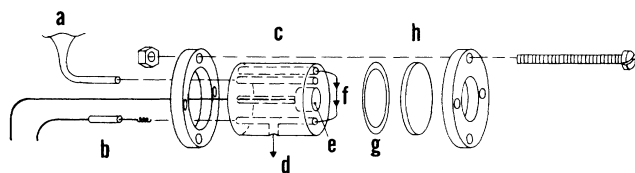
Exploded view of the thin-layer electrochemical sample chamber. The assembly is held together with four screws, only one of which is shown. (a) Glass fixture through which electrical contact with the reference electrode (not shown) is made. (b) Pt wire counter electrode. (c) Main body of the chamber, Teflon. (d) Output for solution flow. (e) Sample. (f) Schematic representation of the direction of solution flow. (g) Teflon gasket-spacer. (h) Quartz window.
